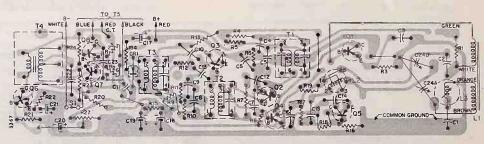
View of Printed Wiring Board. NOTE: Gray area represents printed wiring: black symbols and lines represent components and wiring on opposite side.
